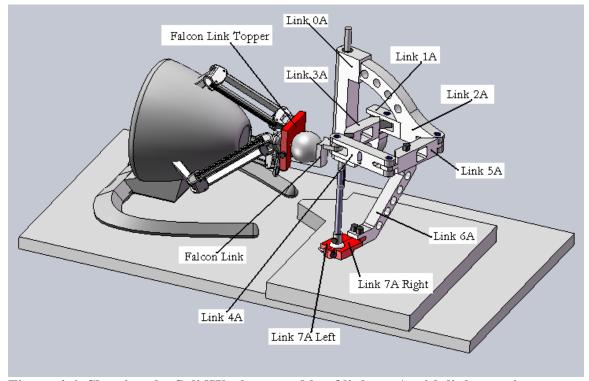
Showing the SolidWorks assembly of linkage A with link notation.
